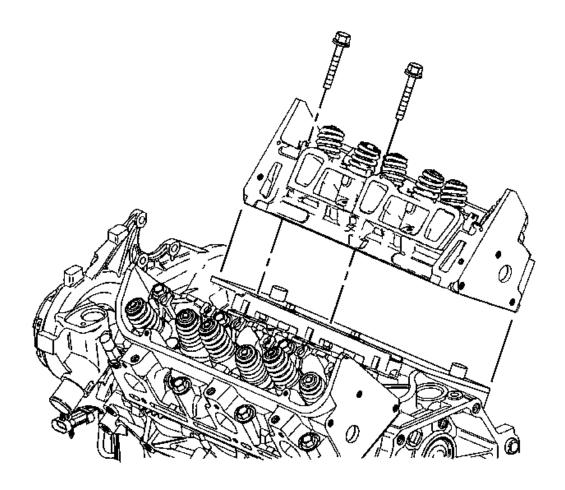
Installing Right Cylinder Head Courtesy of GENERAL MOTORS CORP.
